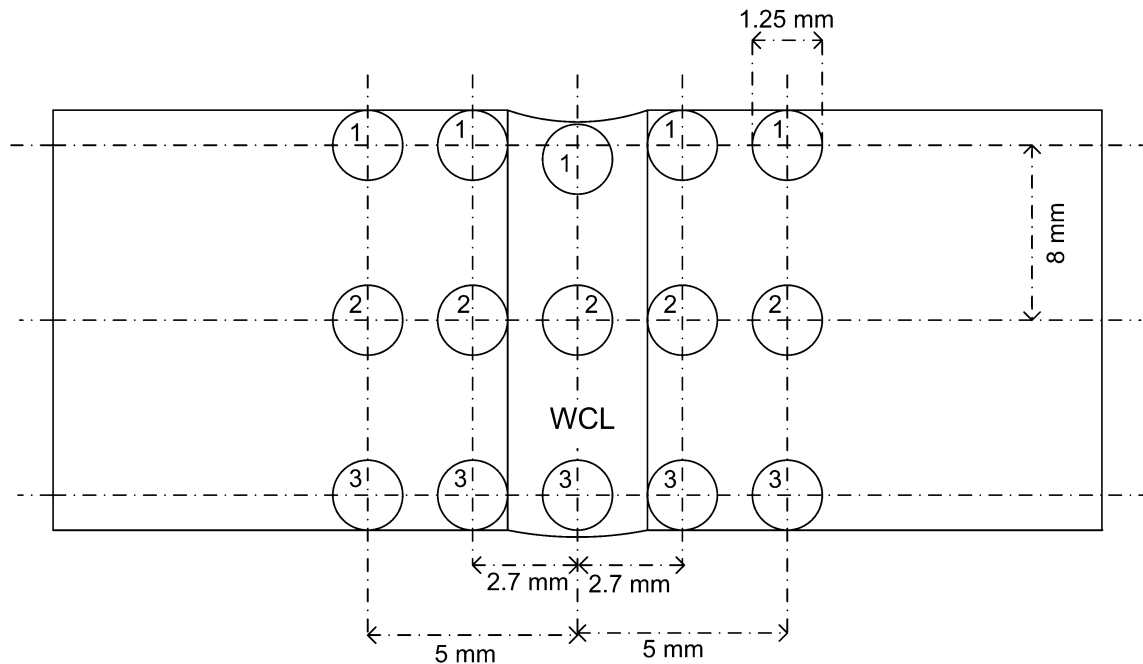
Schematic representation of various places from which samples were cut from the welded plate. Here, WCL is the weld centerline. Samples representing the heat-affected zone were taken at 2.7 and 5 mm from the weld centerline. (Note: Measurements from samples 1 through 3 at each transverse location were averaged.)
